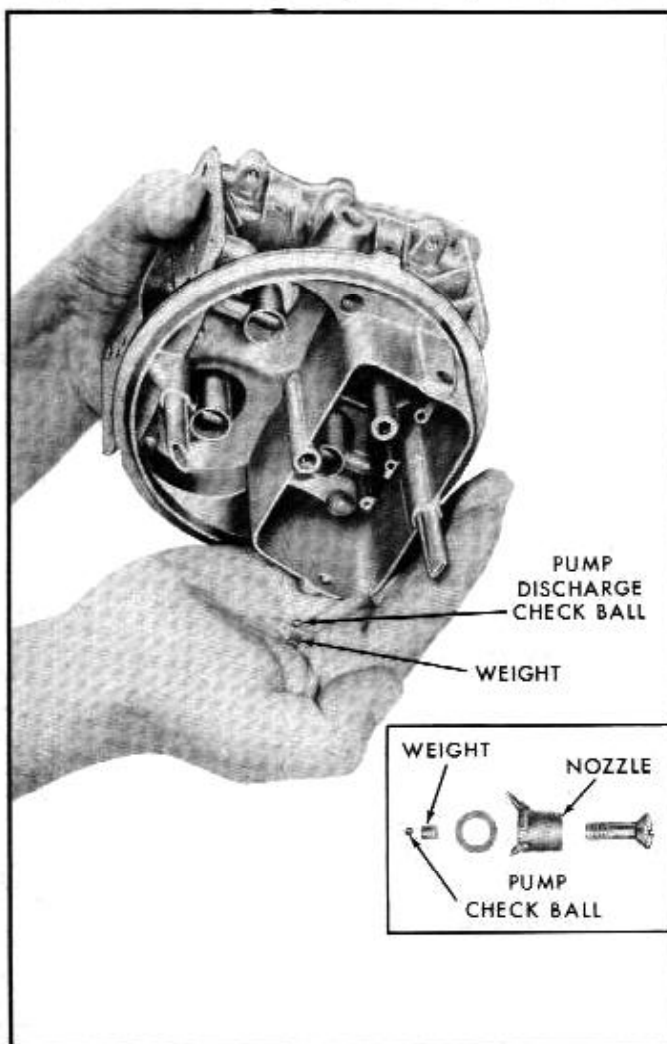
D-39—Removing Pump Nozzle, Weight and Check Ball
